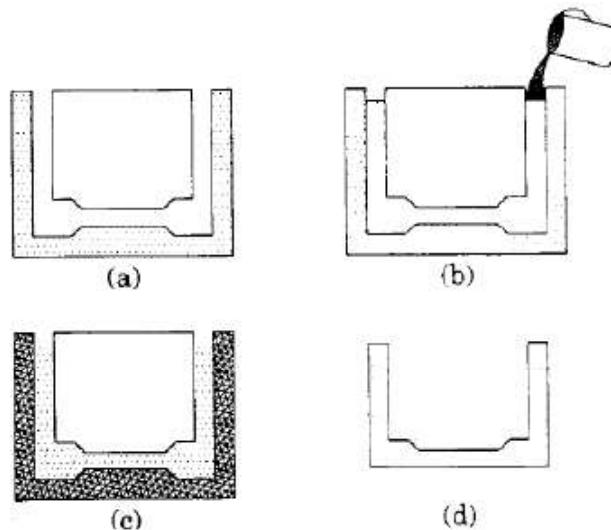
Principles of slip casting. (a.) Assembled mould (b.) Filling the mould (c.) Absorbing water from the slip (d.) Finished piece, removed from the mould and then trimmed
